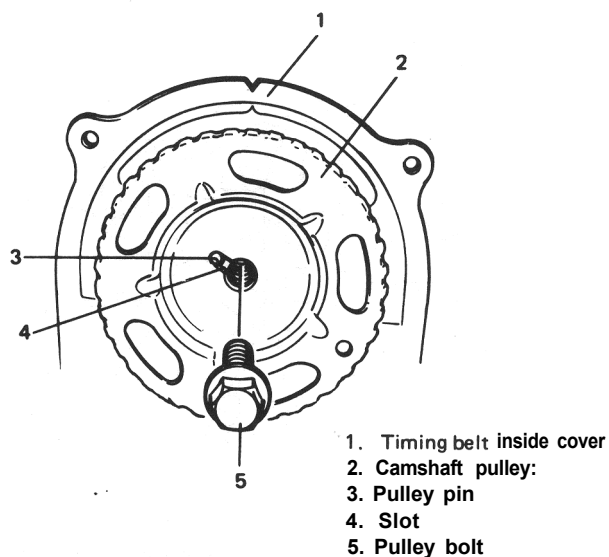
Pulley pin, slot and pulley bolt
